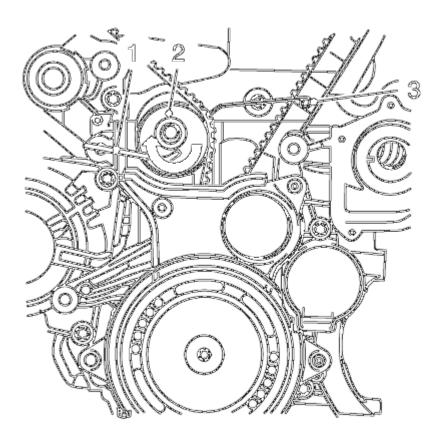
View Of Camshaft Holder And Markings Courtesy of GENERAL MOTORS COMPANY
